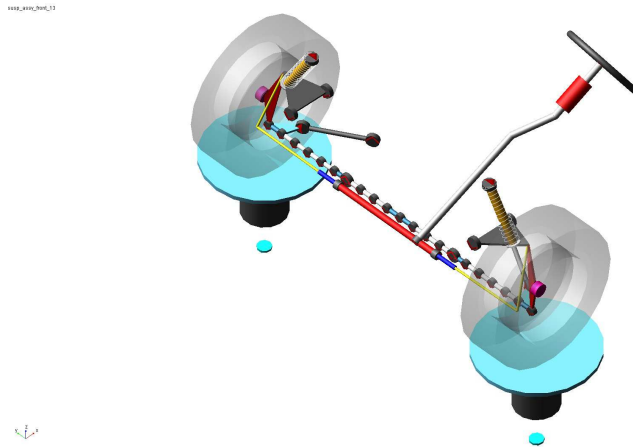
Front suspension in Adams/Car including the brake rods and with coil spring as replacement for the air spring.
